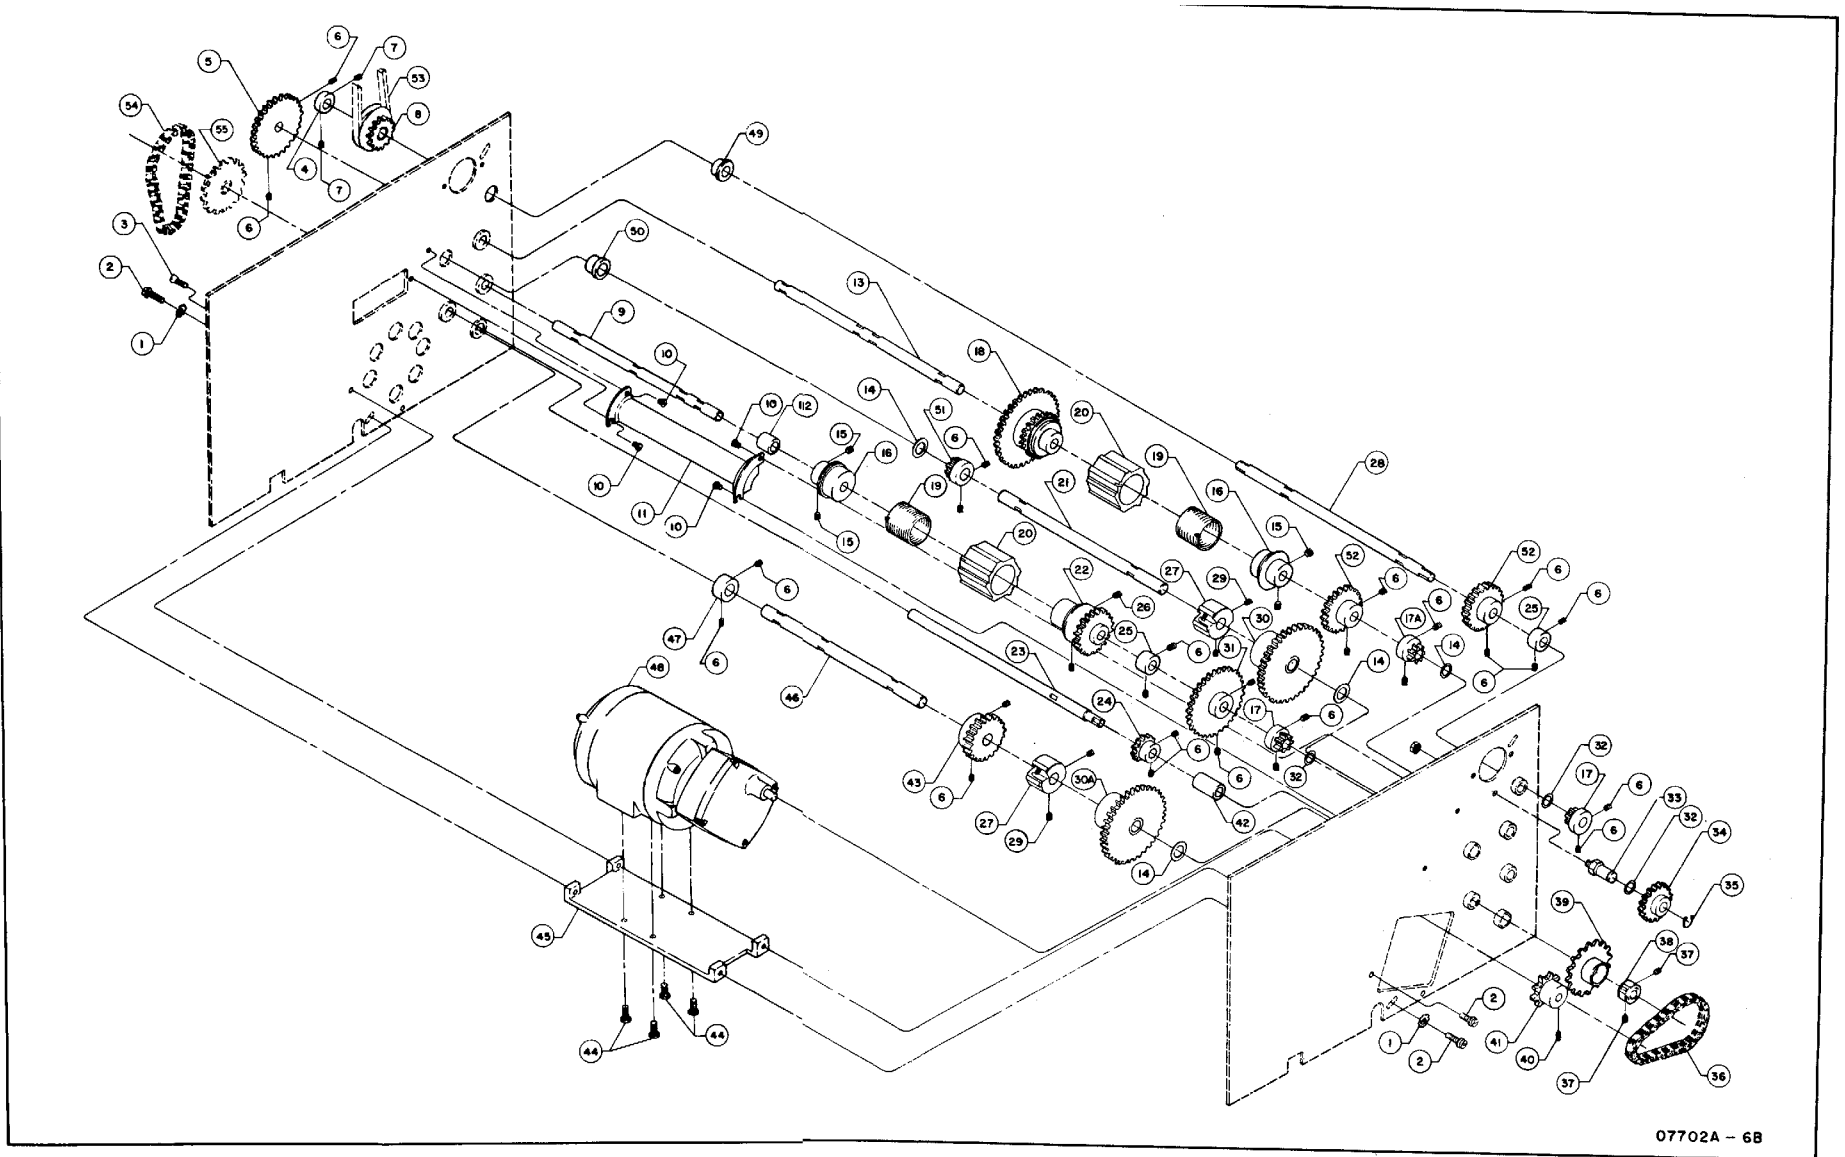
Paper Drive Assembly (table, brake and associated parts)
